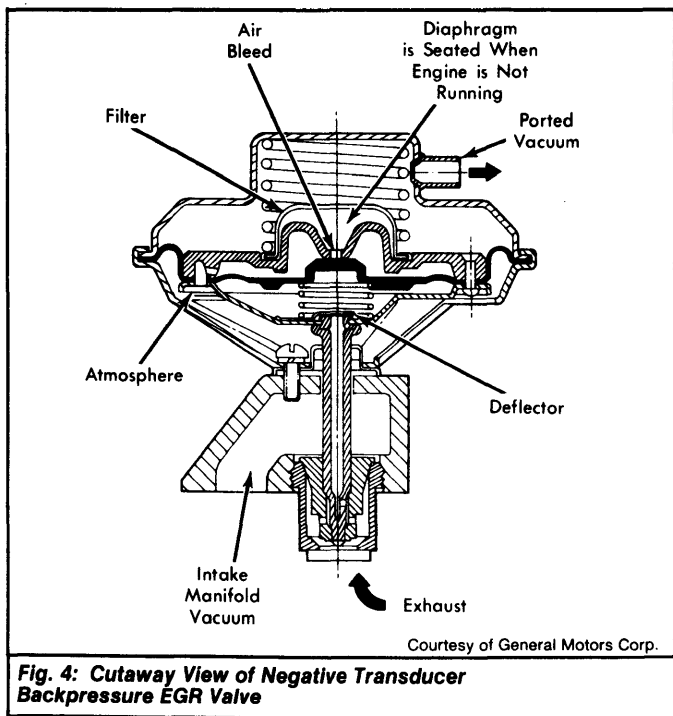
Cutaway View of Negative Transducer Backpressure EGR Valve
